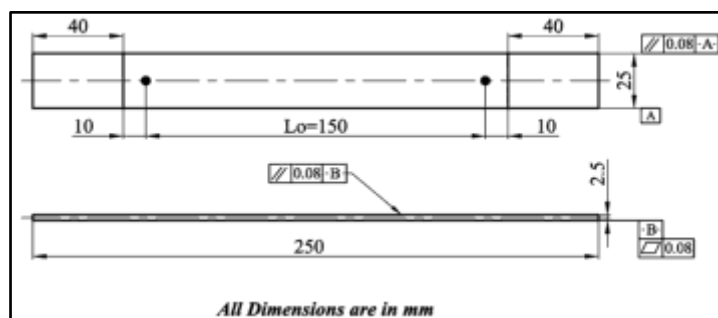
shows ASTM Standard specimen dimensions for Tensile Test
